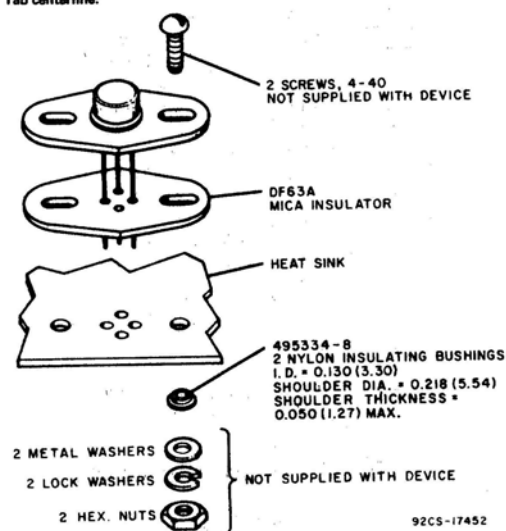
Suggested mounting hardware for JEDEC TO-5 with mounting flange.
